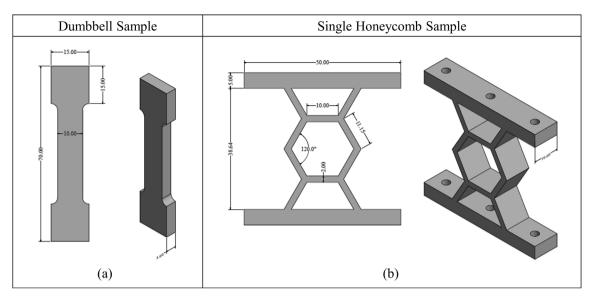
4D printed sample geometry (dimensions in mm). (a) Dumbbell tension sample. (b) Single cell honeycomb sample.
